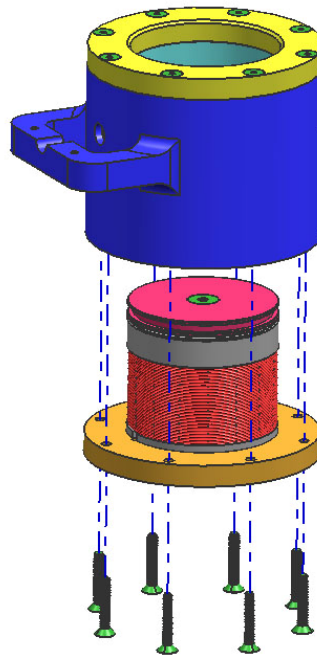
The core and Bottom Plate assembly is attached to the Outer Shell with 8 flat head screws.
